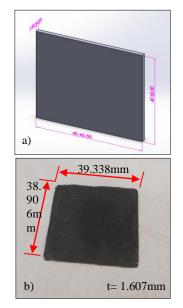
Cubic Shape, a) Solidworks Drawing, b) Printed Part
